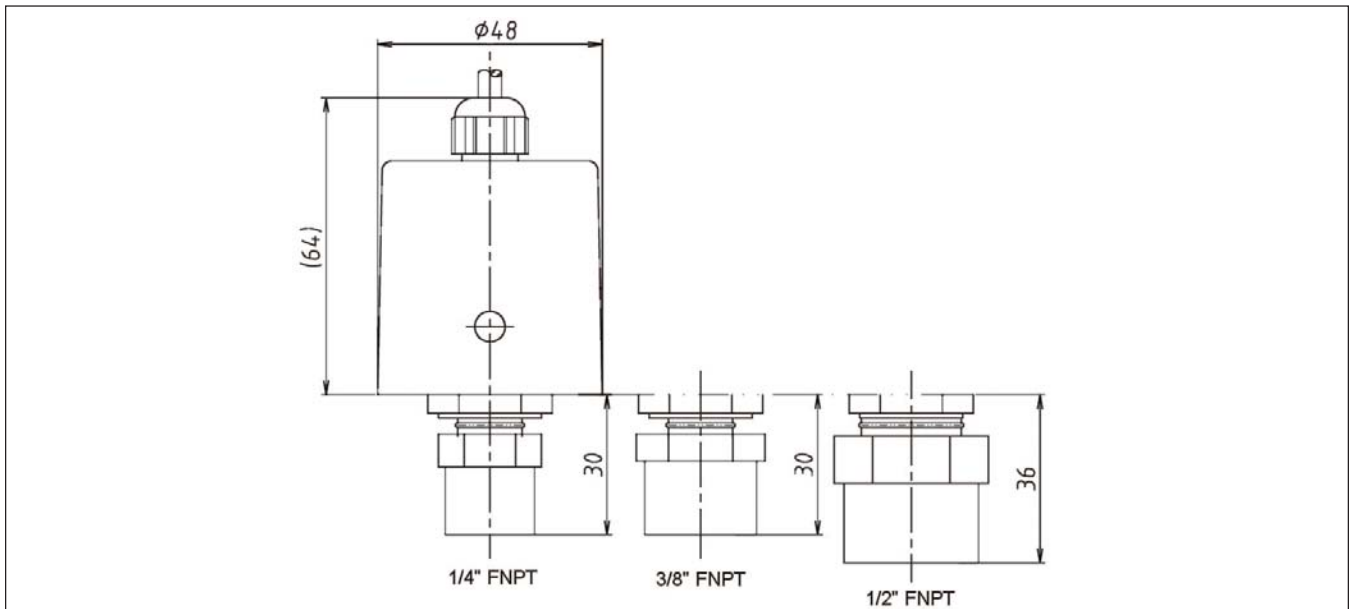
Dimensional Drawing of the Brooks® Model SFP32 Female NPT Fittings.
